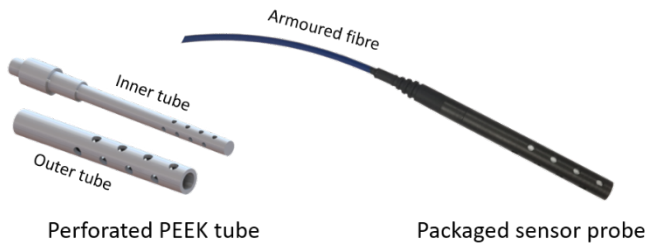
Two-component perforated peek outer tube and smaller inner tube (left) design and the packaged sensor probe with armoured fibre (right).
